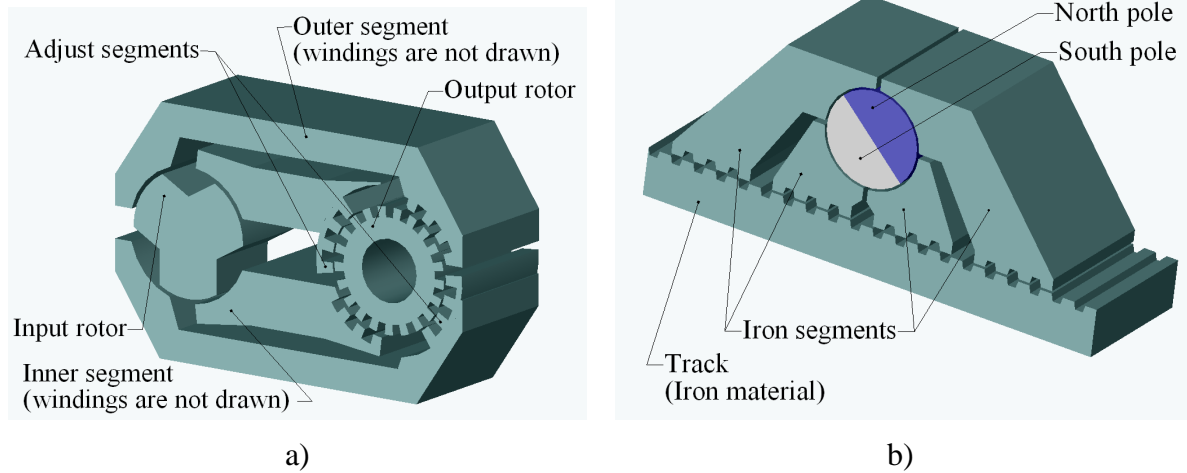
a) Flux moving gear mechanism with electro magnets [37]. b) Linear magnetic gear [38].
